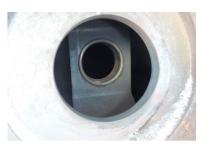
Eduction pipe placement in guide assembly over BOV, TILX 731739. January 27, 2022.
